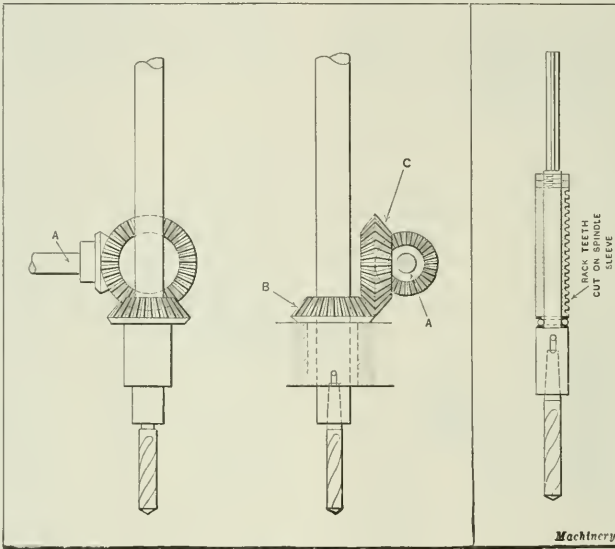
Radial Drilling Machine Spindle with Drive Gear brought Close to Spindle
